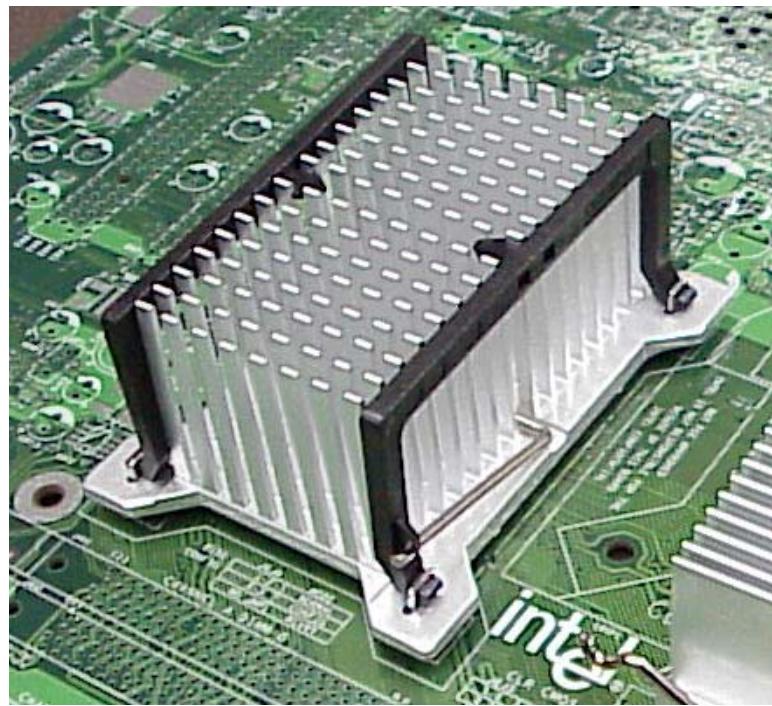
Balanced Technology Extended (BTX) (G)MCH Heatsink - Installed on Board
